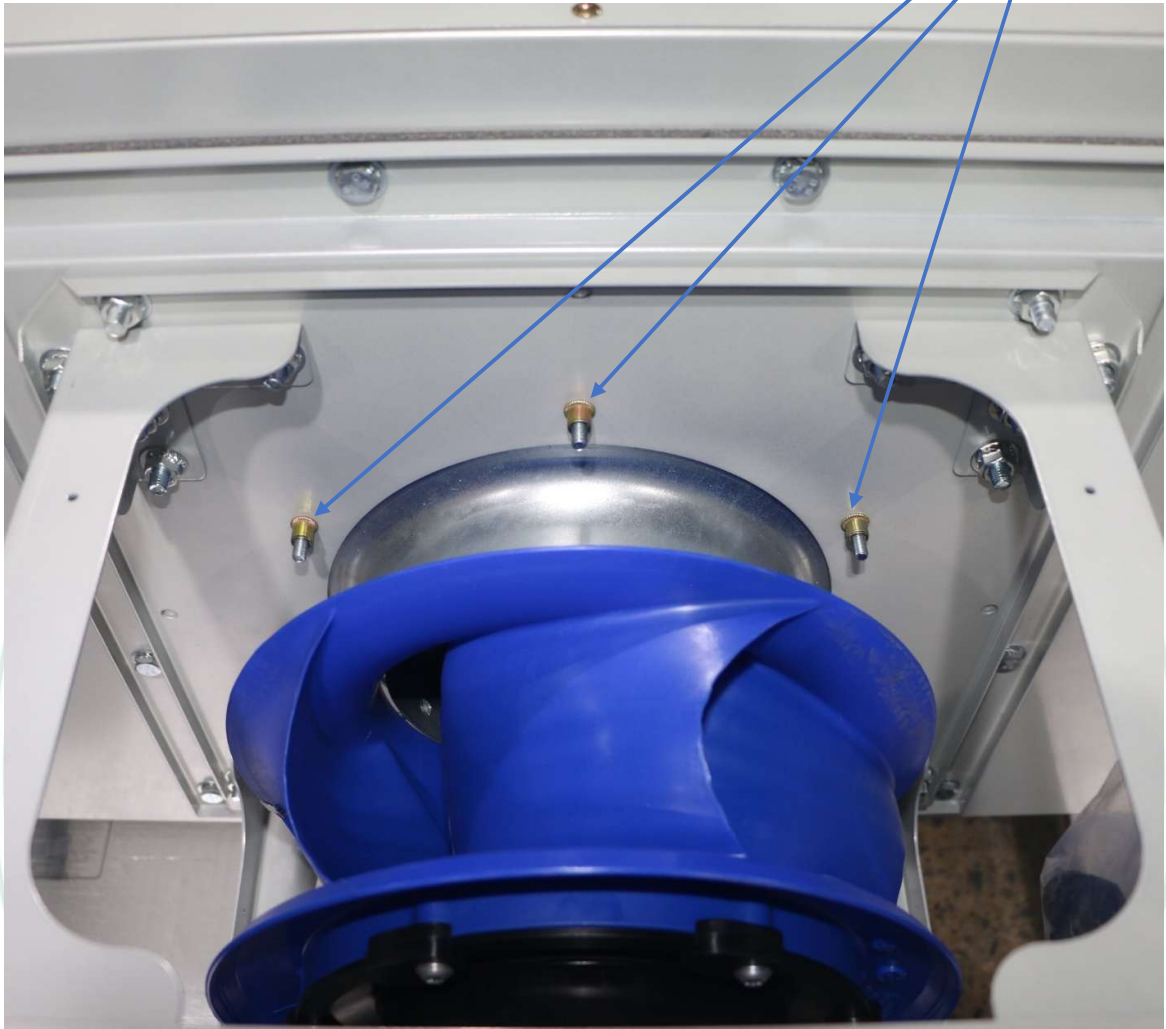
Losing 6 screws securing the suction hole to readjust the gap between the blades and the air intake
